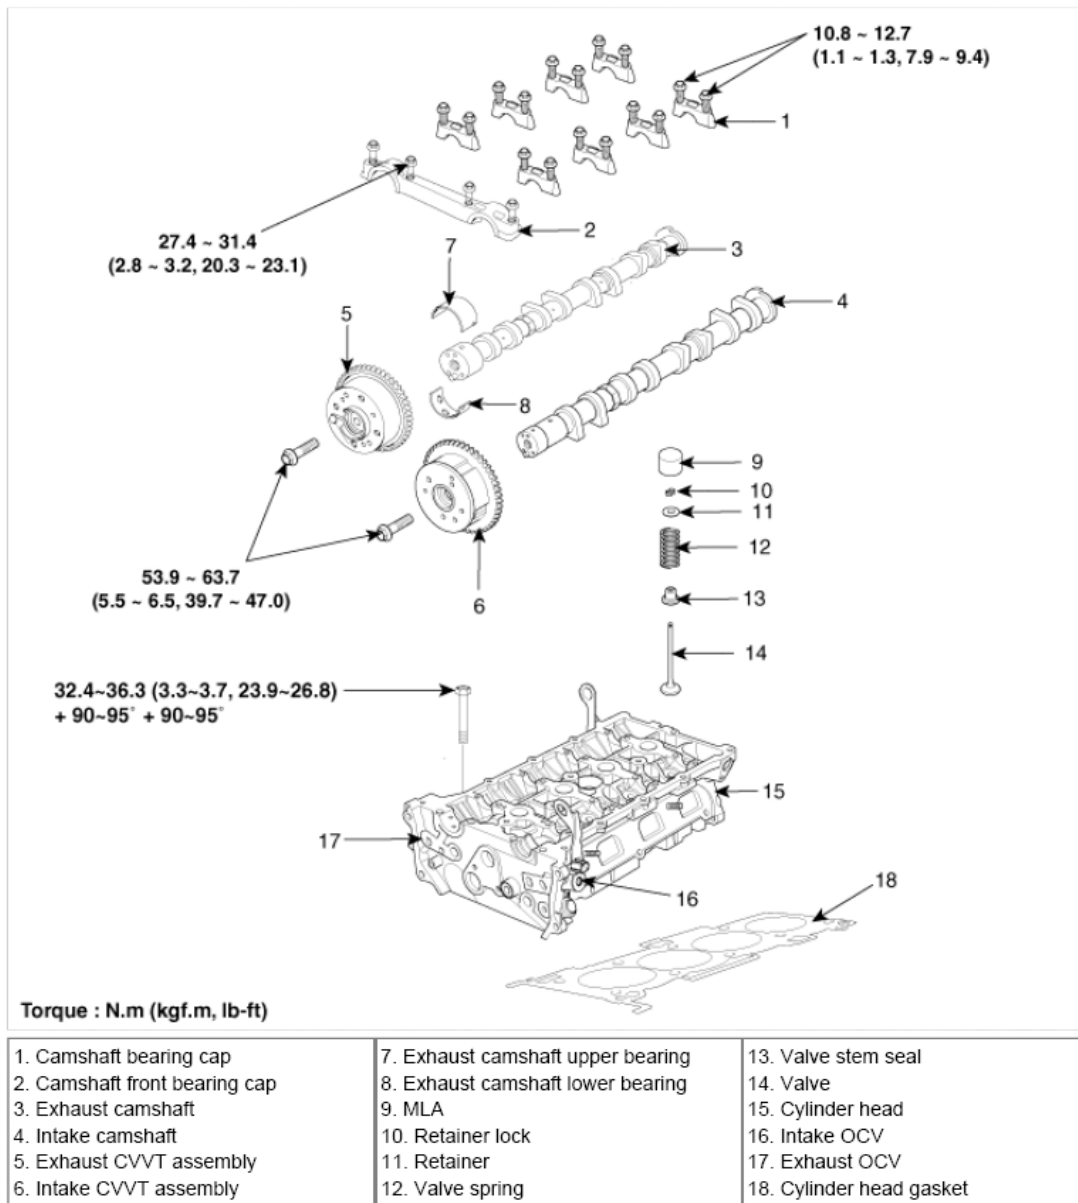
Exploded View Of Cylinder Head With Torque Specifications (Dual CVVT)
